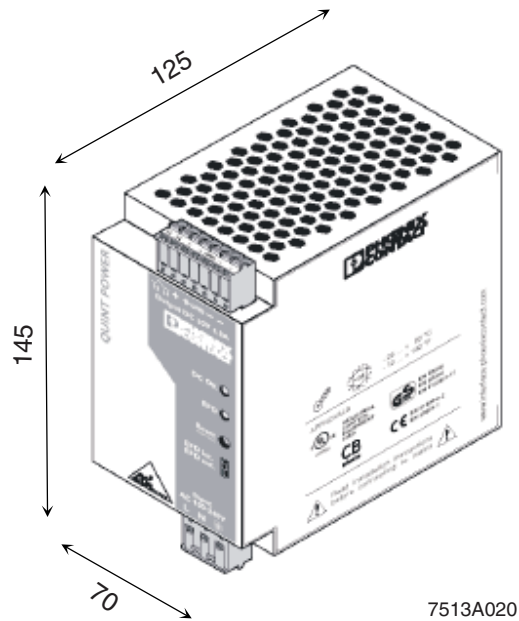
Housing dimensions of the ASI QUINT 100-240/4.8 A EFD power supply unit in mm
